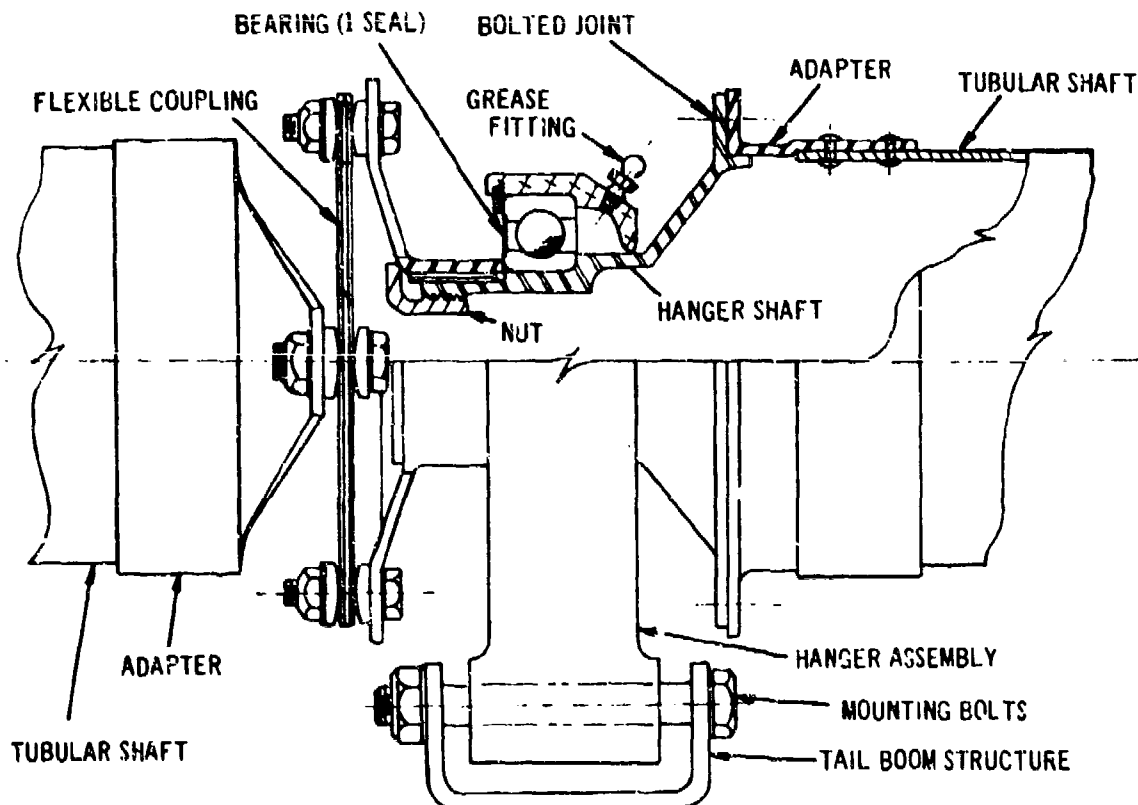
Typical Bearing Hanger Assembly — Subcritical Shaft Assembly
